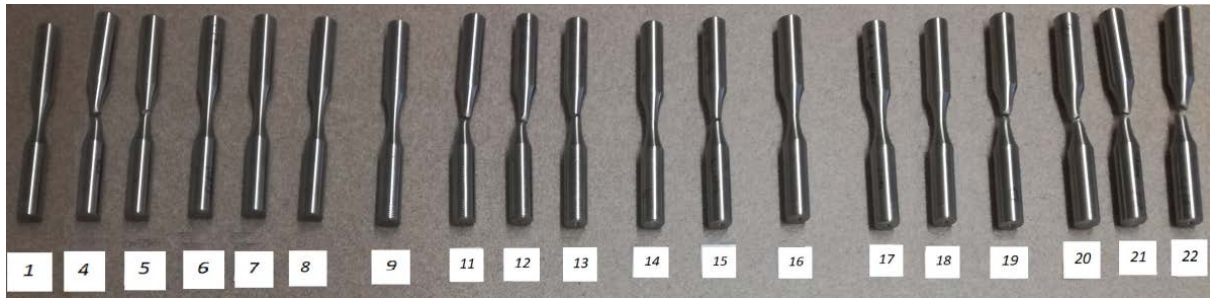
Specimens after axial fatigue tests (Dantas, 2019).
